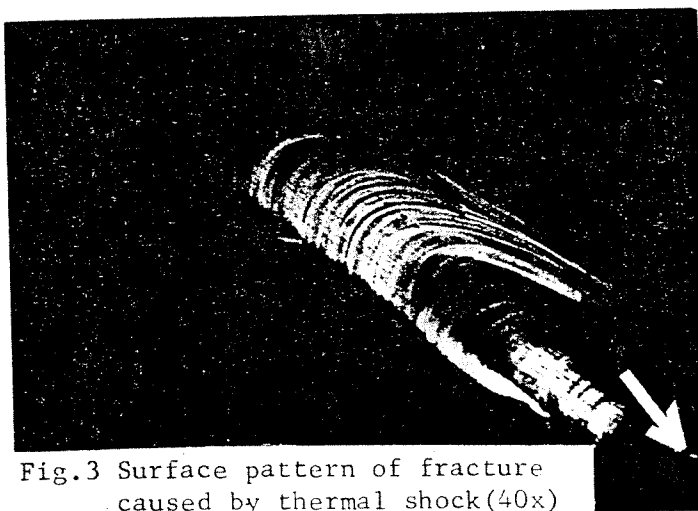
Surface pattern of fracture caused by thermal shock(40x)
